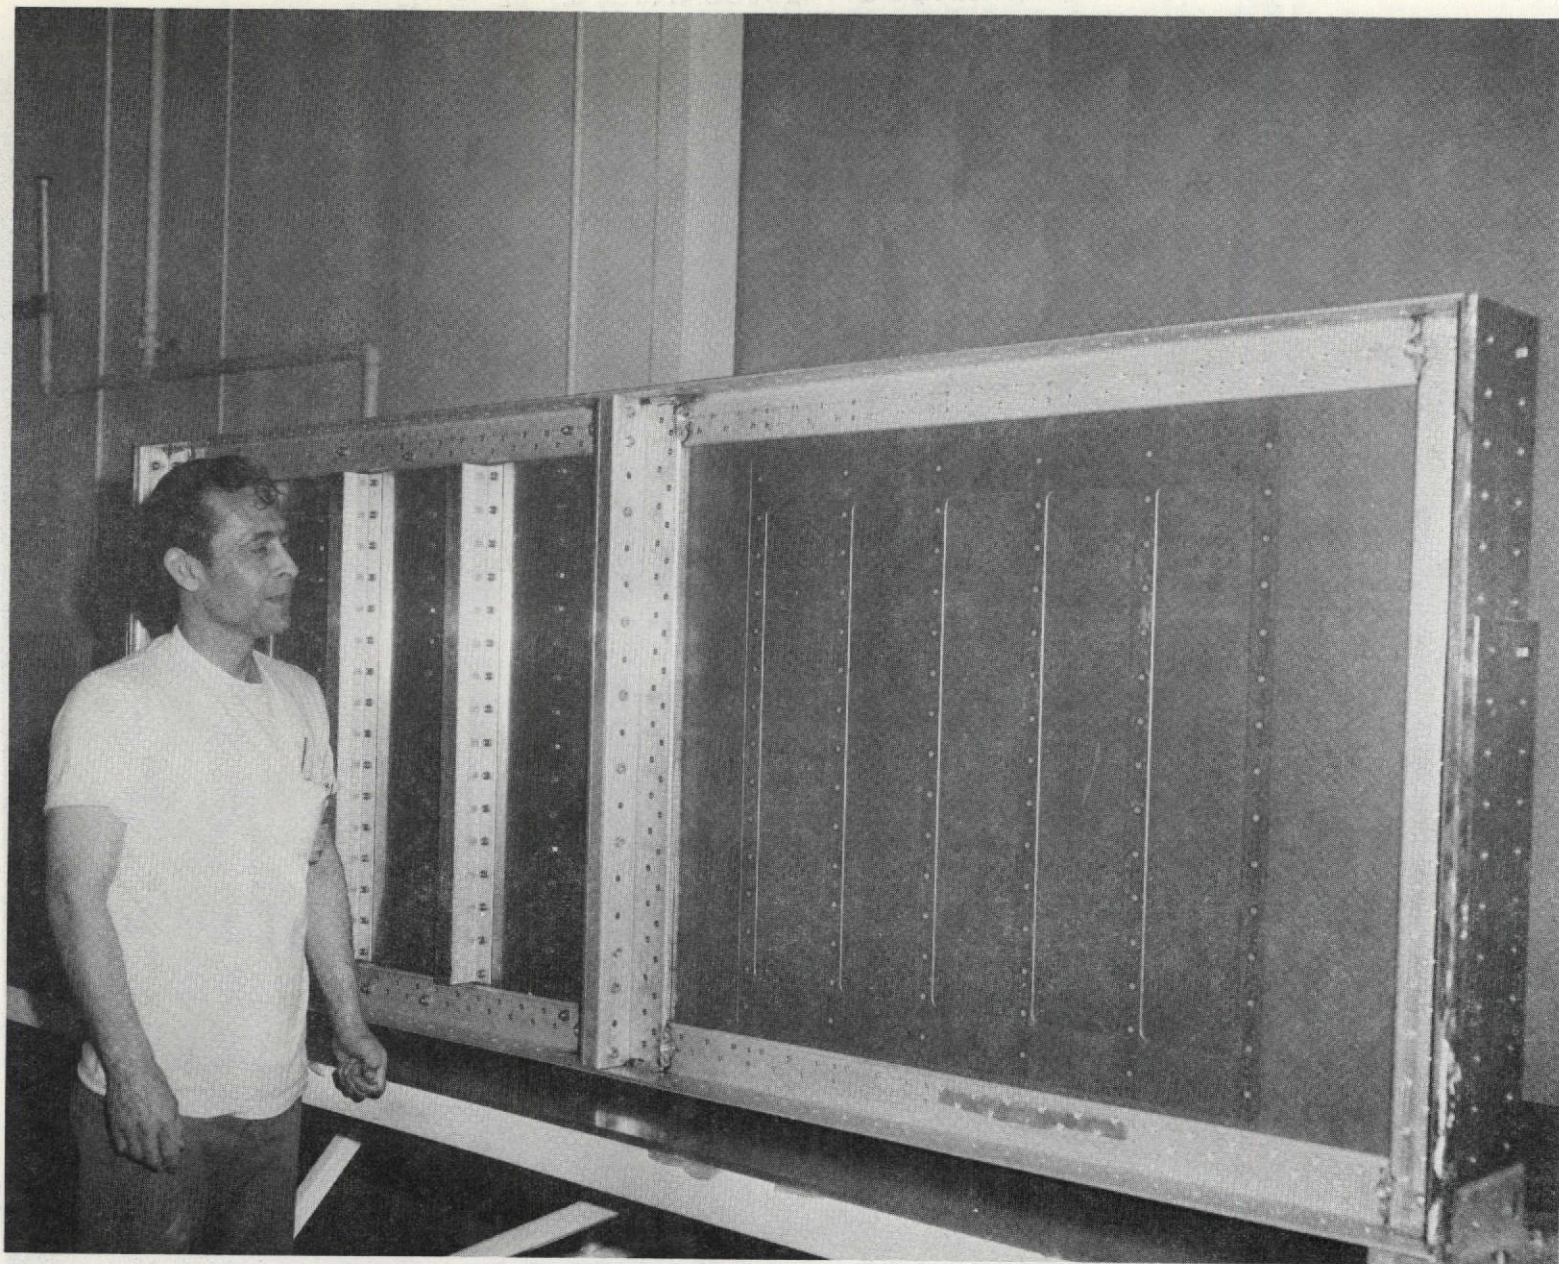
TEST WEB BEAM ASSEMBLY (WITHOUT B/E REINFORCED STIFFENERS)
